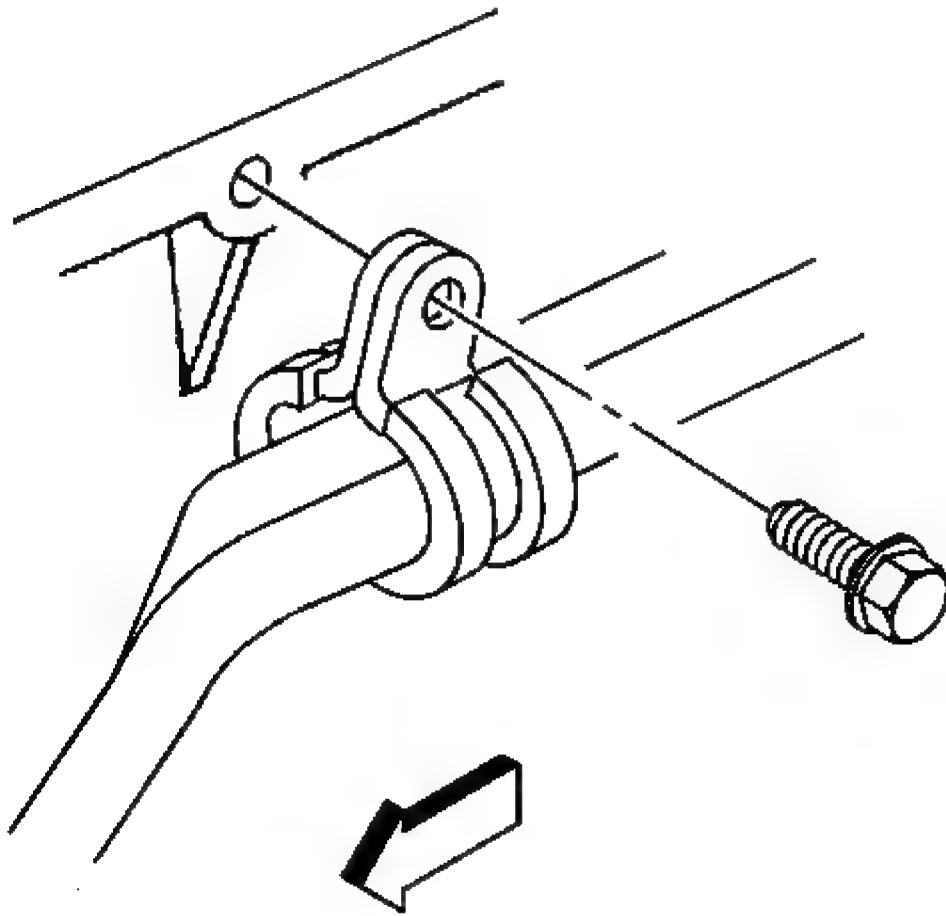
View Of Remote Oil Filter Inlet & Outlet Hose Clip Bolt
